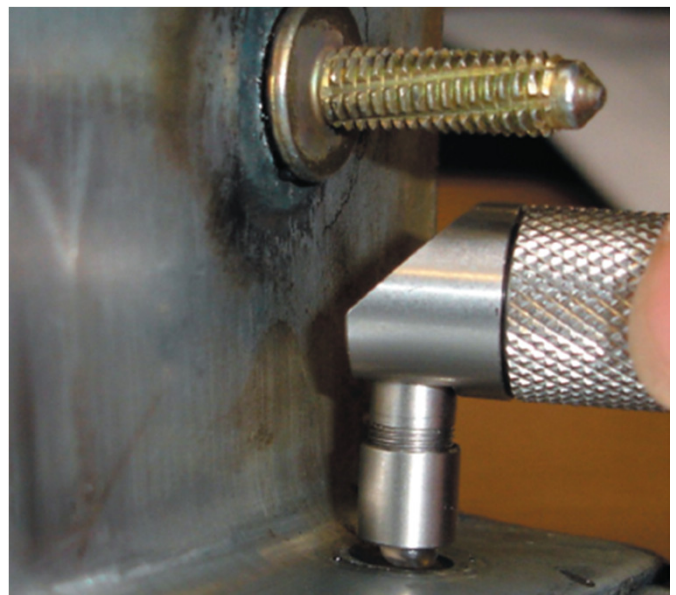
Probe for spot weld testing with 45° mirror
